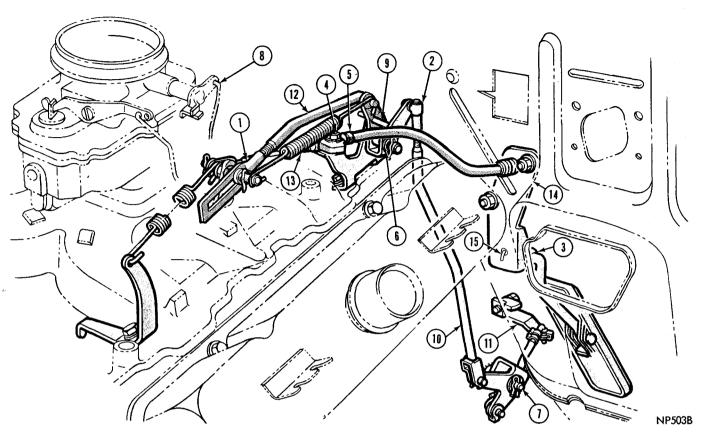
Throttle Rod Adjustment (with 3 Section Throttle Rod)
